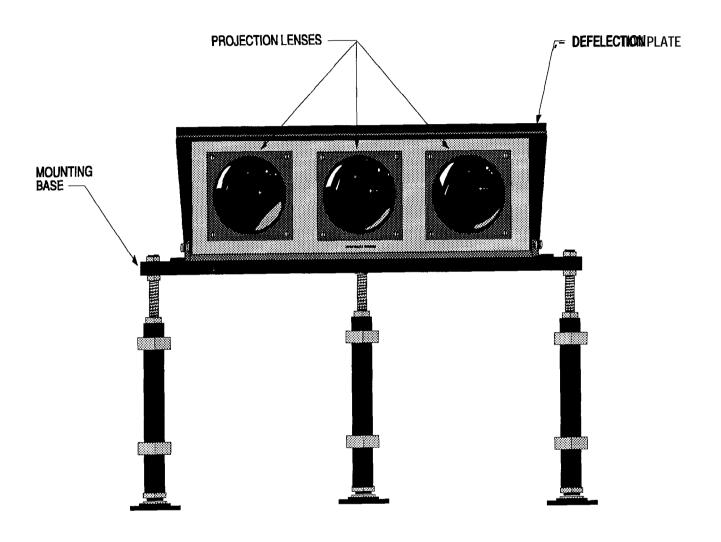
LAMP HOUSING ASSEMBLY (FRONT VIEW)
